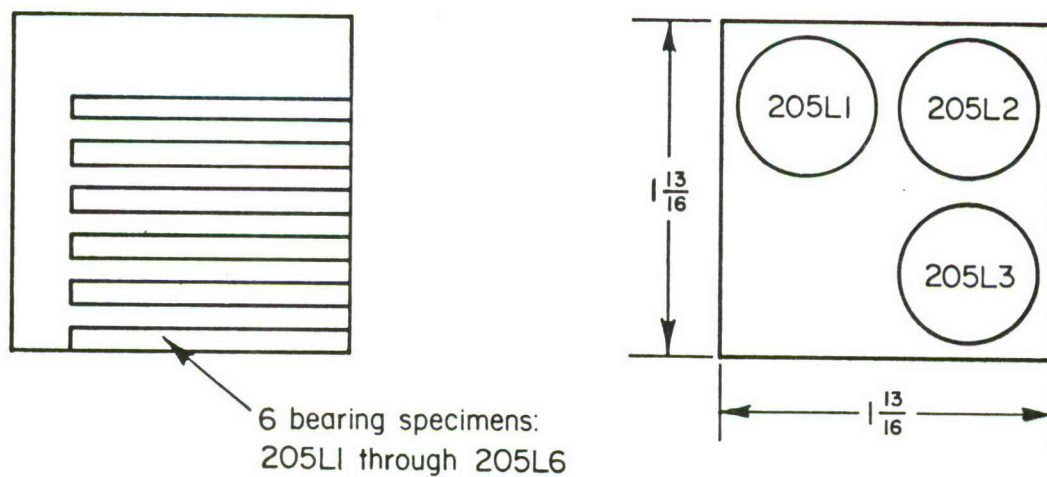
LOCATION OF TEST SPECIMENS FOR
